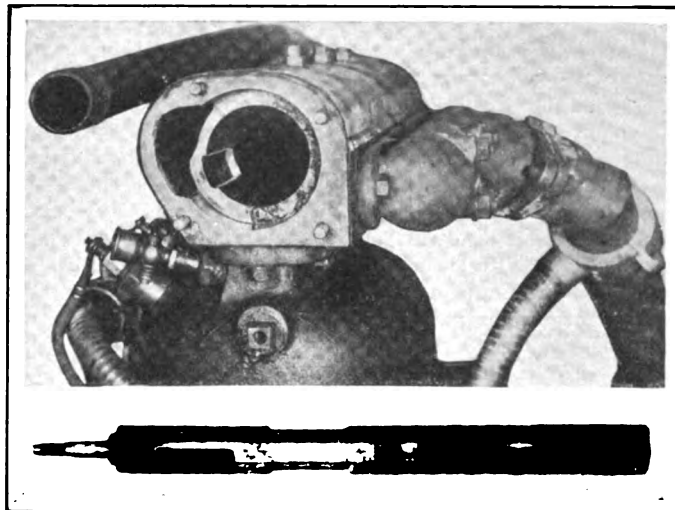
Mounting of the valve housing and, below, the valve withdrawn
